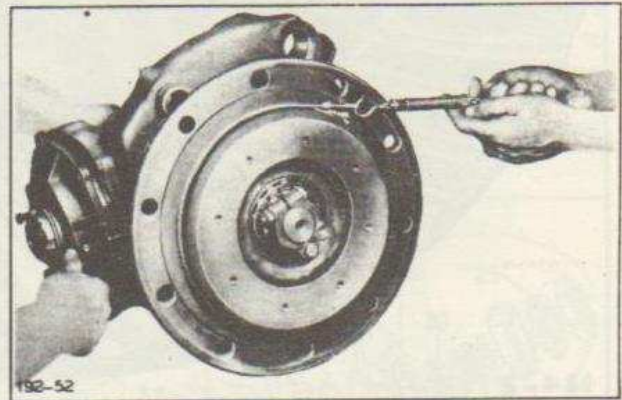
Testing 3rd Reduction Bevel Gear Bearing Adjustment
